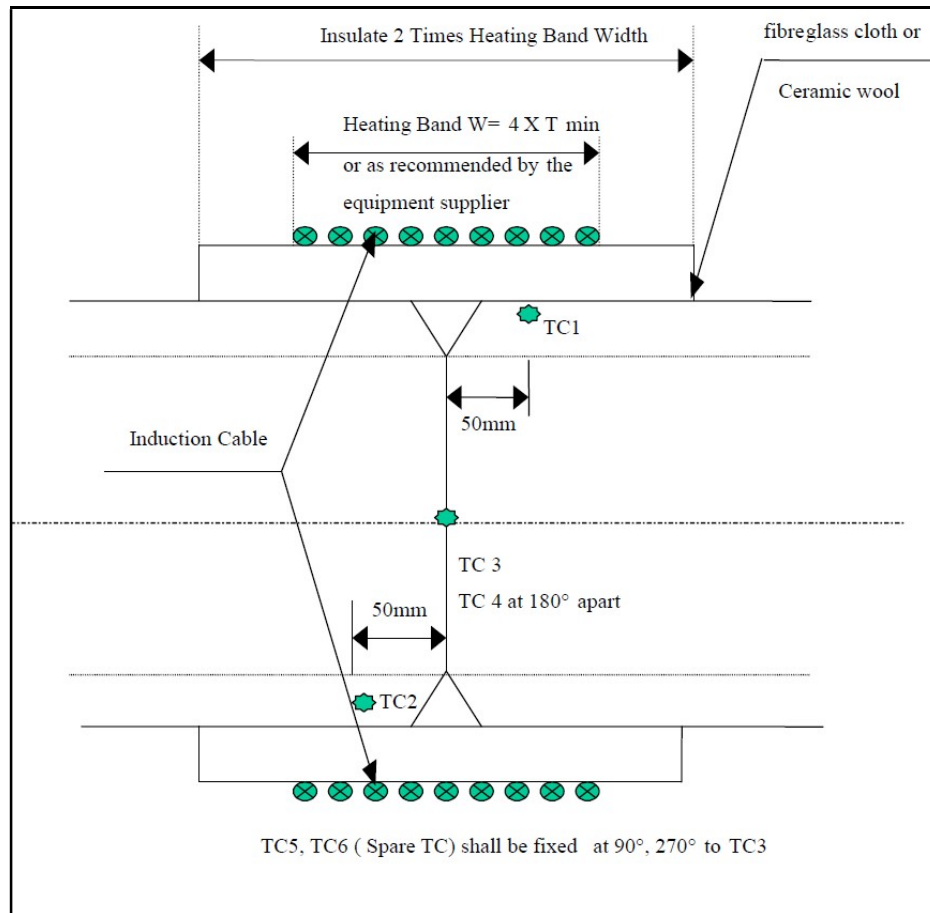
Placement of Thermocouples on P91/P92/F91/F92/C12A materials for PWHT
